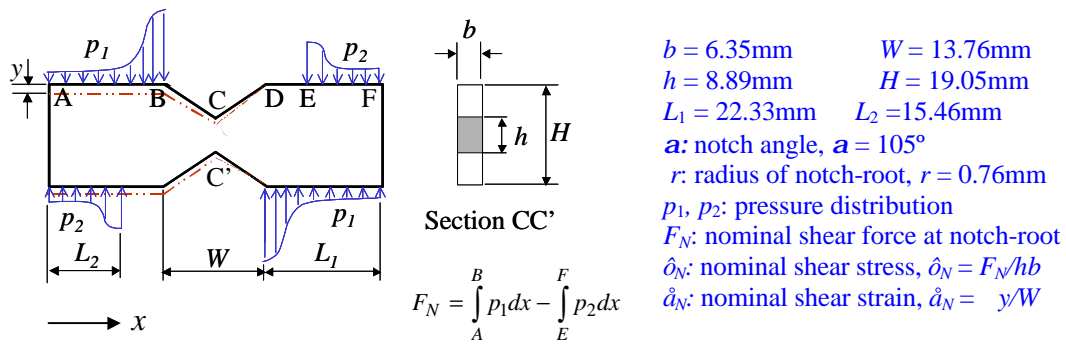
Boundary conditions and dimensions of Iosipescu specimen in A&W fixture
